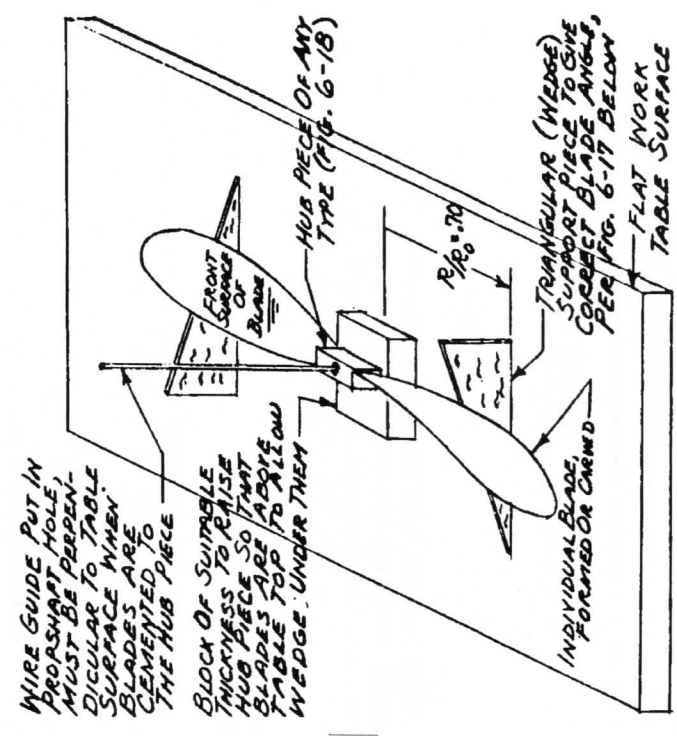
Assembling and Cementing the Blades to the Hub Piece
